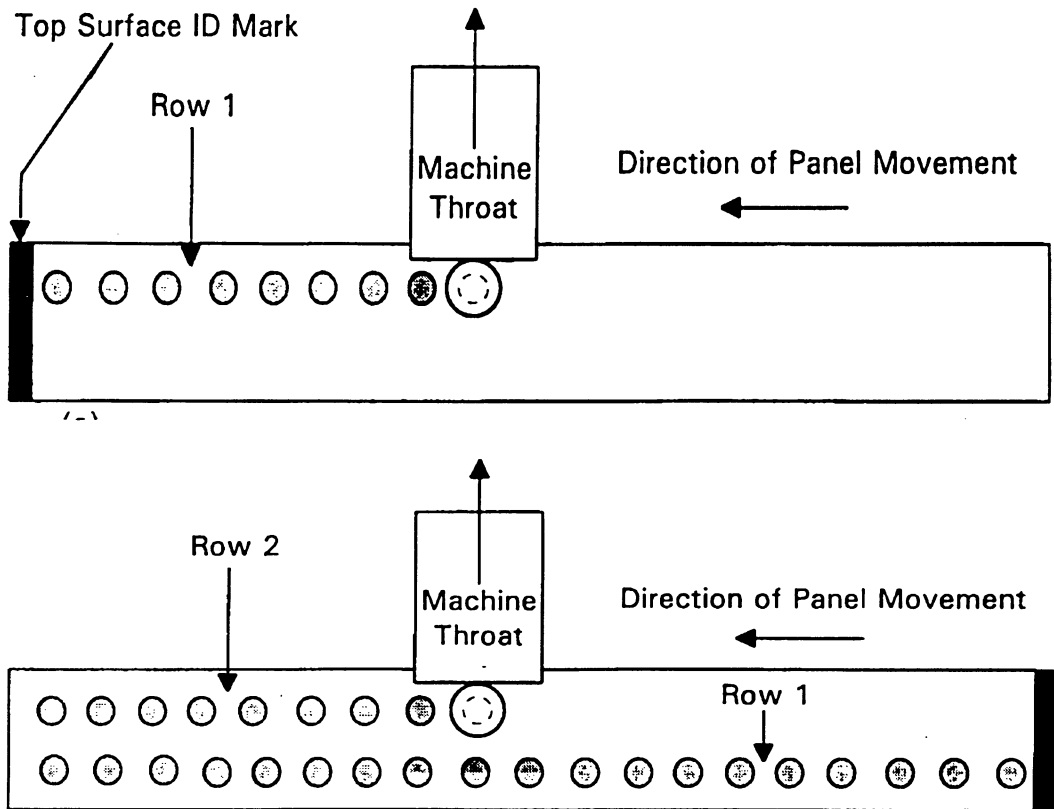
Panel sample orientations with respect to the welding machine throat¹⁸
